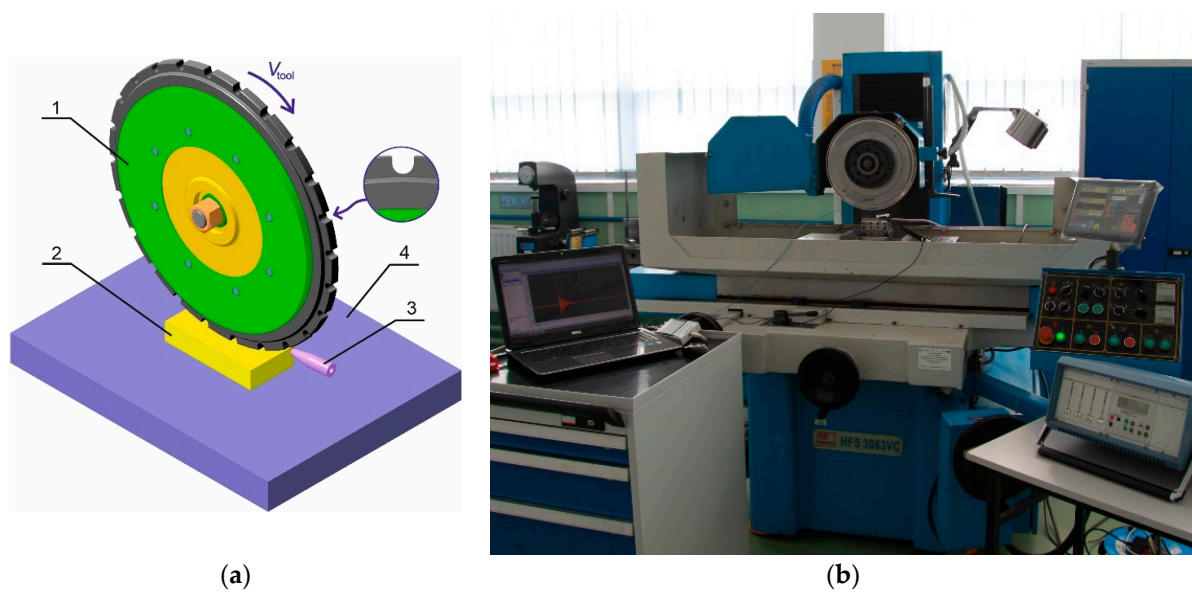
Scheme (a): 1—tool; 2—sample; 3—nozzle (to direct liquid medium to the treatment zone); 4—table of grinding machine; V_{tool} —linear speed of the tool; (b) equipment for TDT of flat surfaces.
